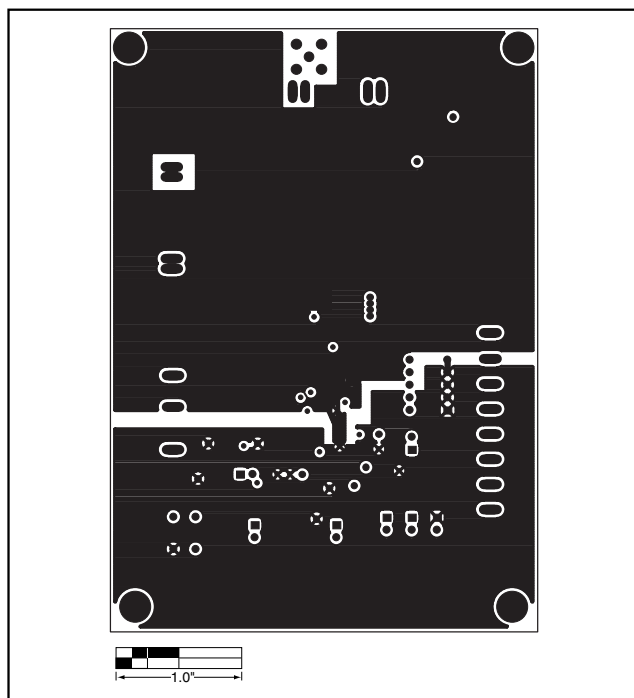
MAX1711 Voltage Positioning EV Kit PC Board Layout—Internal GND Plane (Layer 2)
